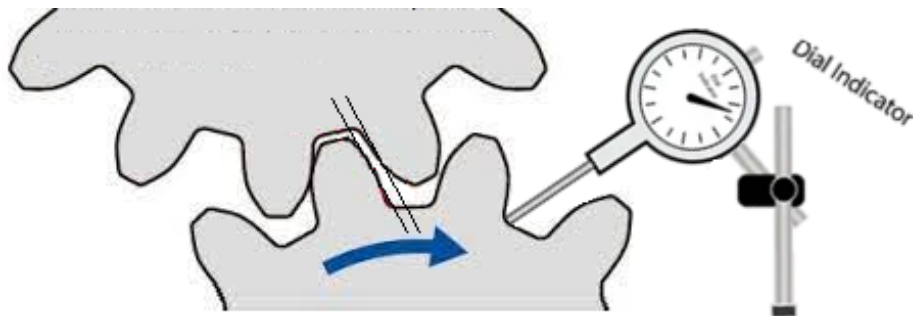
Backlash measurement in coupled gears through a dial gauge
